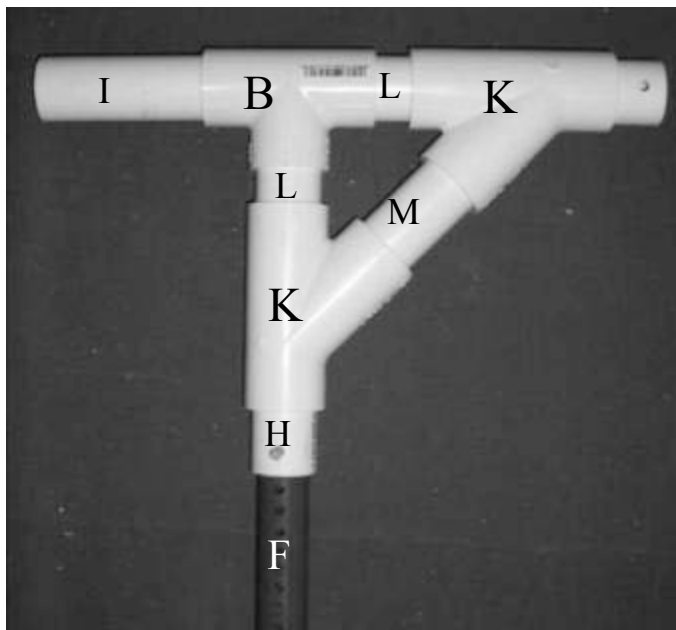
Step 12 – Joining Side Frame to Rear Frame.
